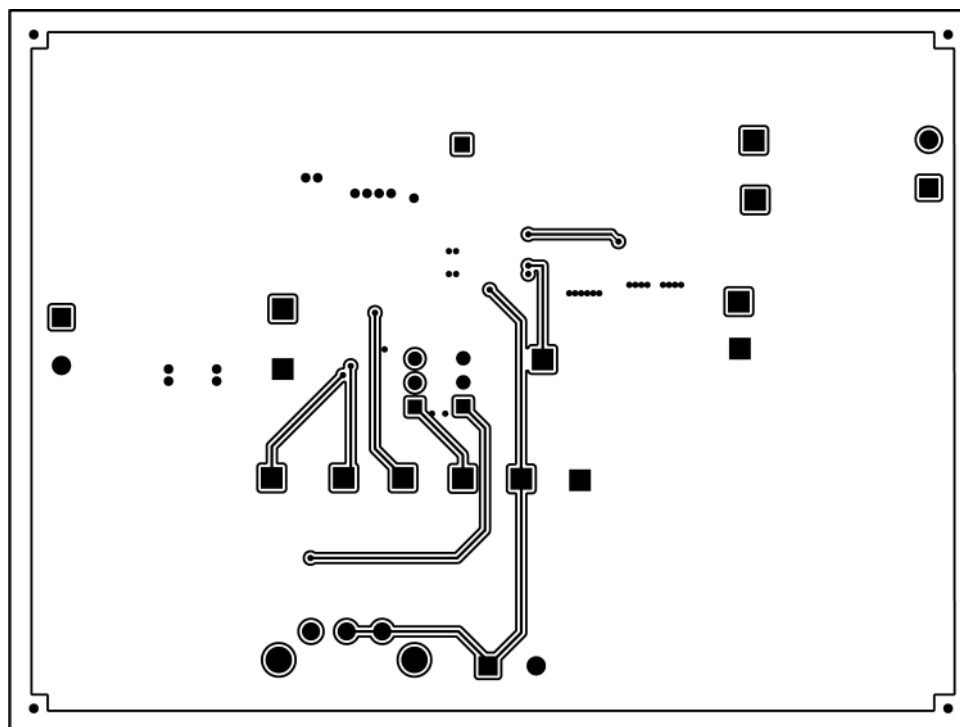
TPS92510EVM-011 Bottom Copper (Bottom View)
